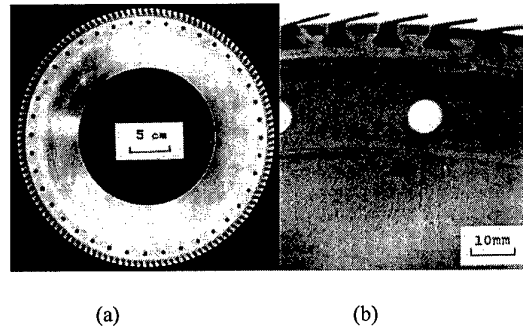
CF J85 CAN 40/15 compressor disc: (a) full view; (b) close up of rim region showing crack initiating from bolt hole [27].
